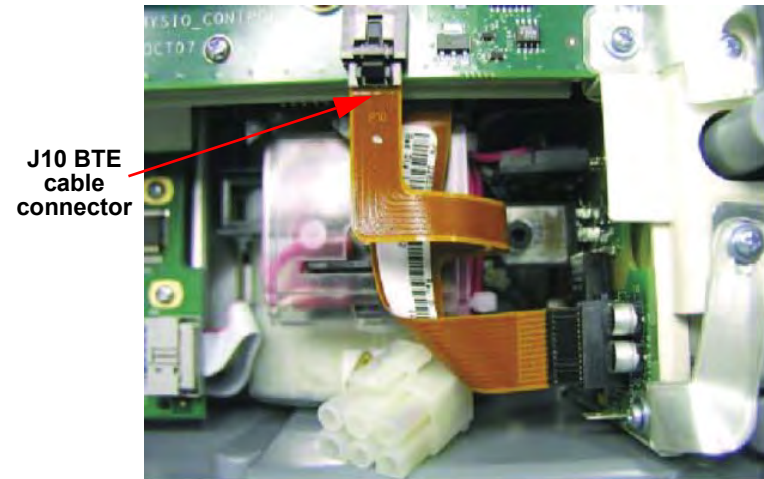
BTE cable connection (V1 cable, three connector type)
